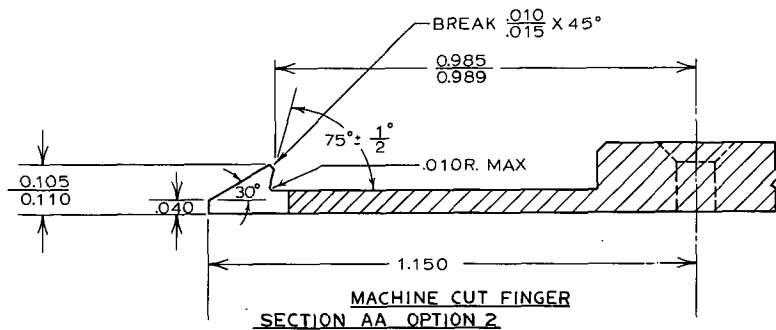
, 300.1-16, 300.1-17, and 300.1-18 are various views of assembled faceplate box components. These drawings indicate maximum and minimum finished dimensions as well as assembly techniques to be applied in manufacture.
